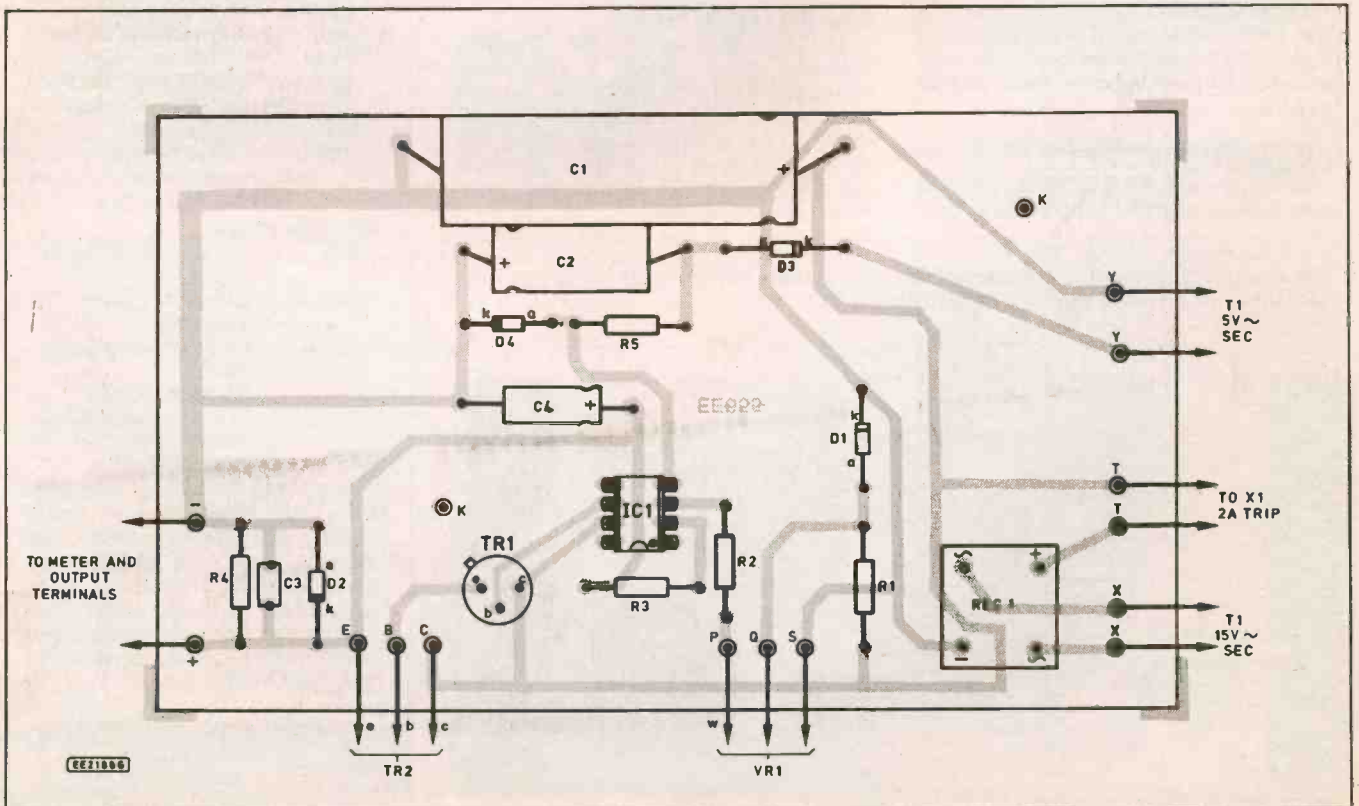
Full size printed circuit copper foil master pattern and topside component layout for the variable power supply. A small TO39 "corrugated" heatsink should be placed over TR1 - see photos. This board is available through the *EE PCB Service*, code EE655.
